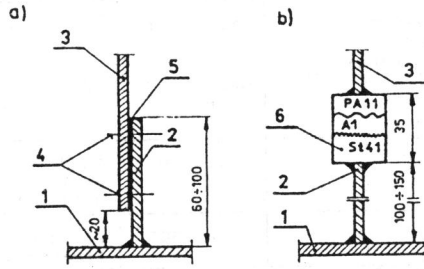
Construction of the union between the superstructure and deck. (a - Rivetted joint, b - Welded joint) 1-Deck, 2-Metallic flat bar, 3-Aluminium alloy (PA11) shell plates, 4-Rivets, 5-Insulating separator, 6-Connector St41+Al+PA11.
